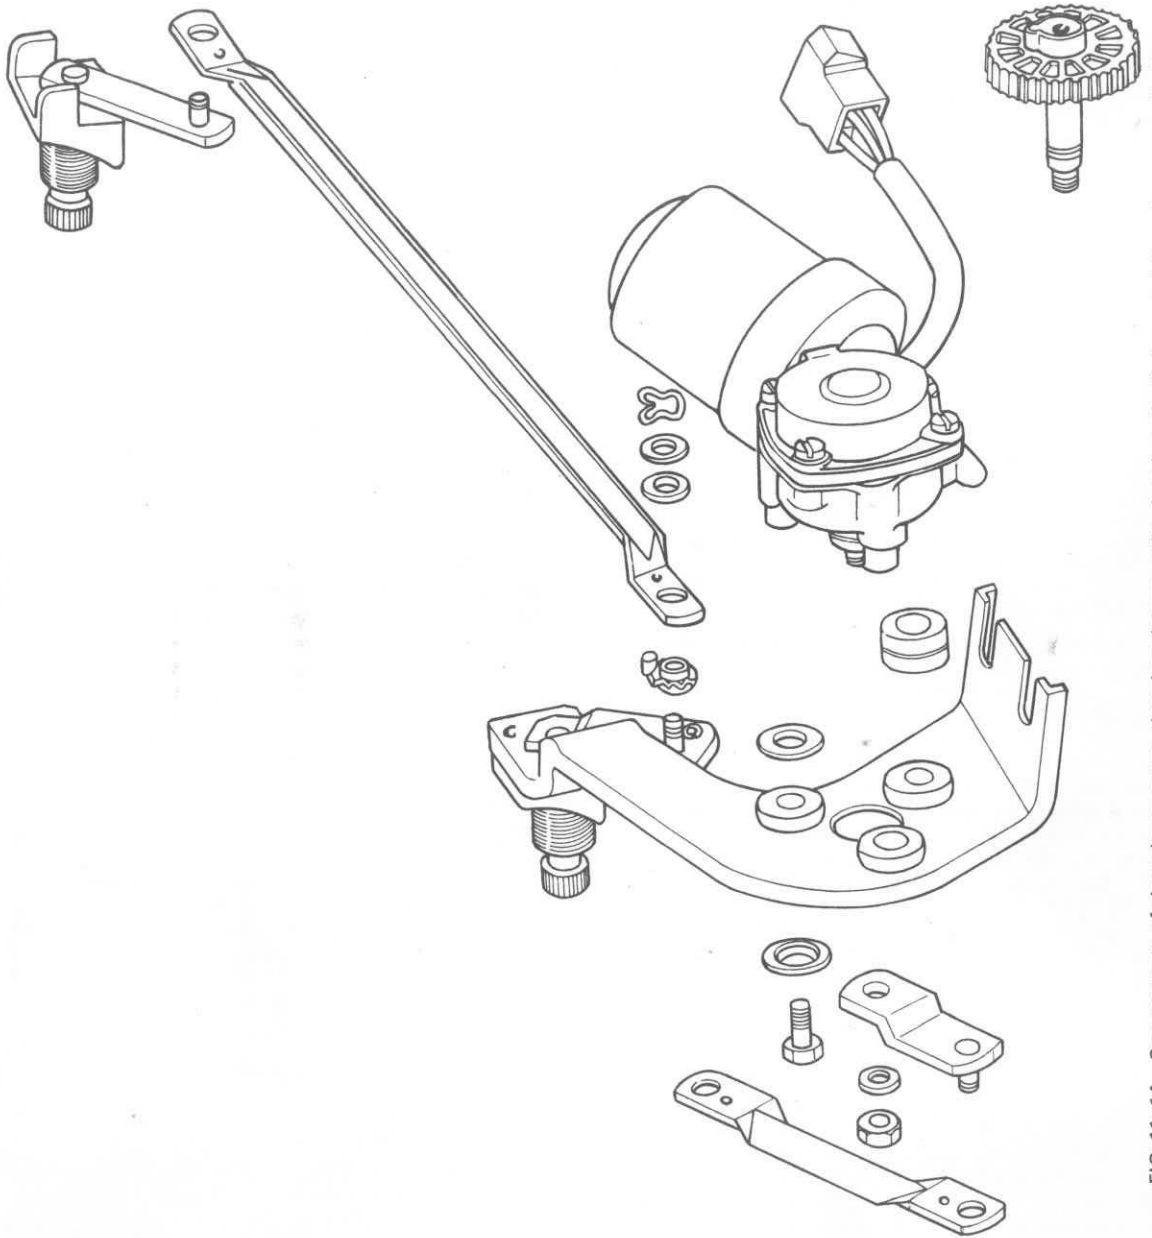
14 Components of the wiper motor, showing the mounting bracket, the linkage and the wiper arm spindles
